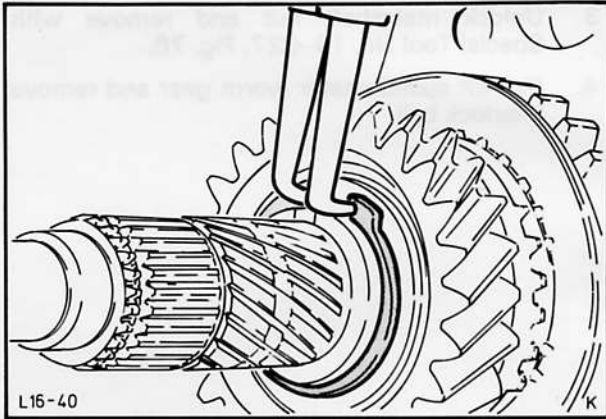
Remove circlip of 1st/2nd gear synchroniser hub
